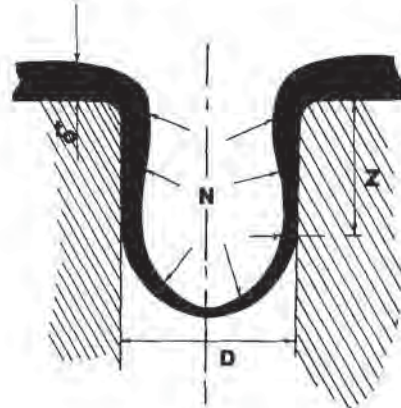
Geometric factors for extensional draw-down v. sliding of sheet into female mold
